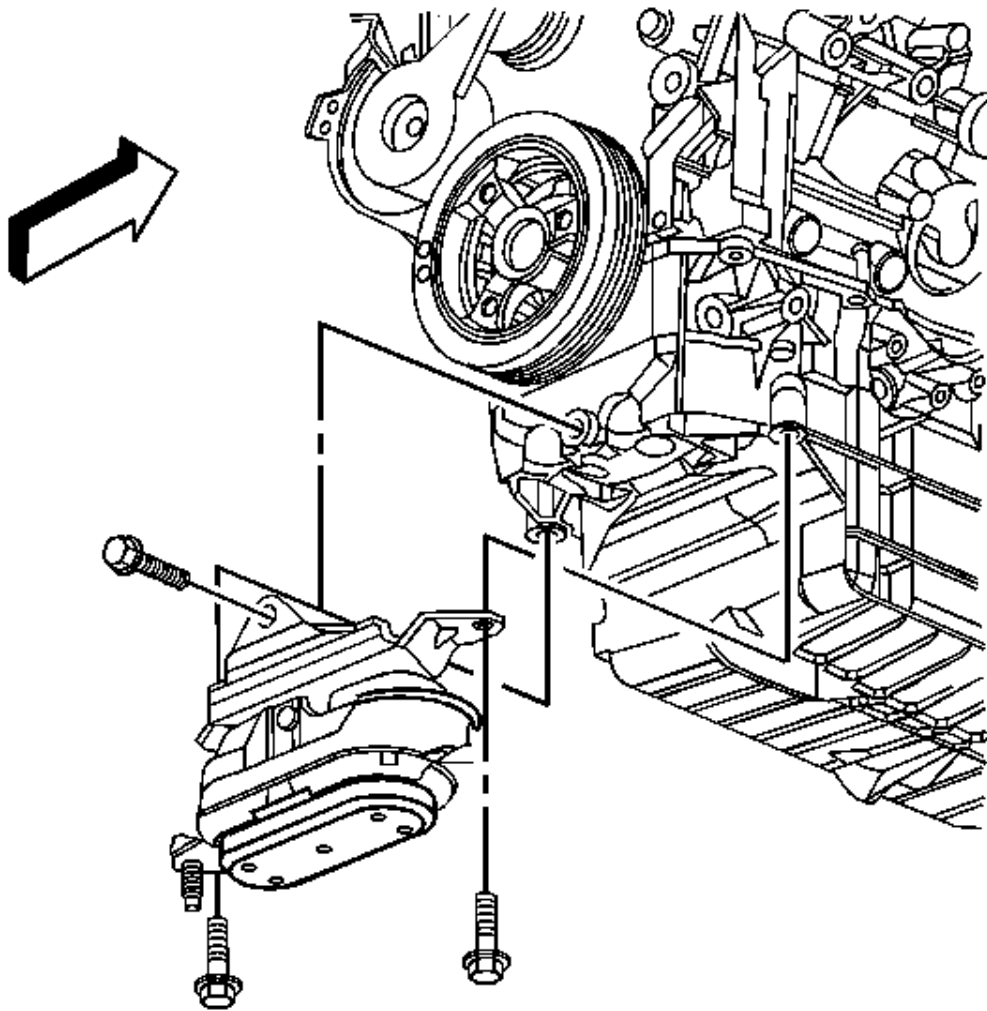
Identifying Engine Mount And Bracket To-Oil-Pan Bolts
